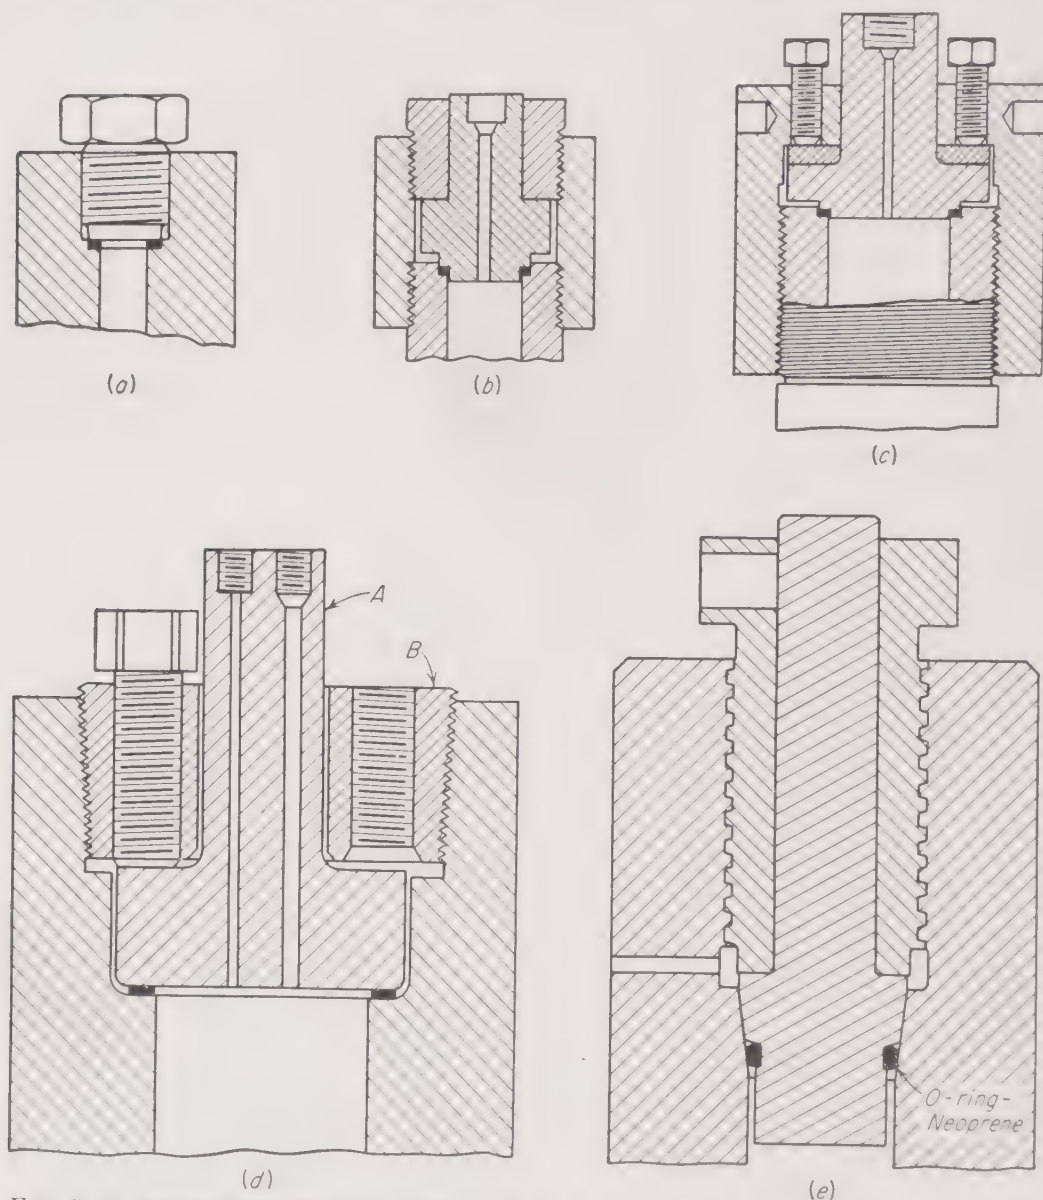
Screwed closures. (a) Screwed plug, gasketed. [From D. Meigs, *Trans. Am. Inst. Chem. Engrs.*, 39:769 (1943).] (b) Screwed sleeve and plug. (c) Compression head. (d) Tapered cap-ring closure. (e) O-ring closure. (*Autoclave Engineers Inc.*)
